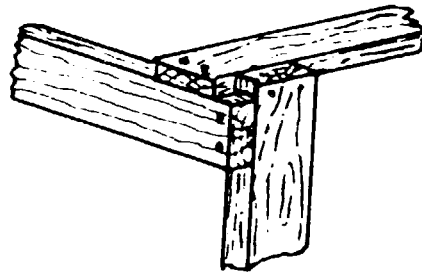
"Three-way" corner construction in wooden boxes and crates
